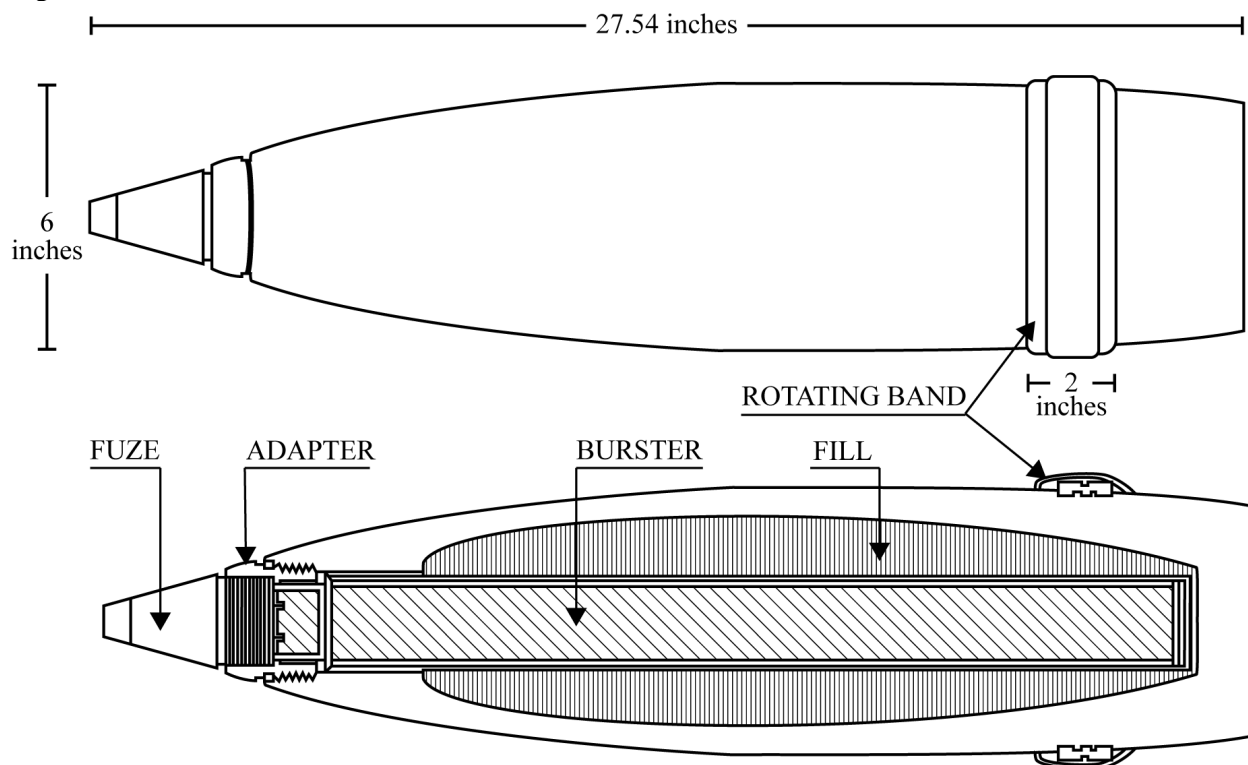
Projectile, 155-mm, Gun, M122 (T179) - Line Drawing
